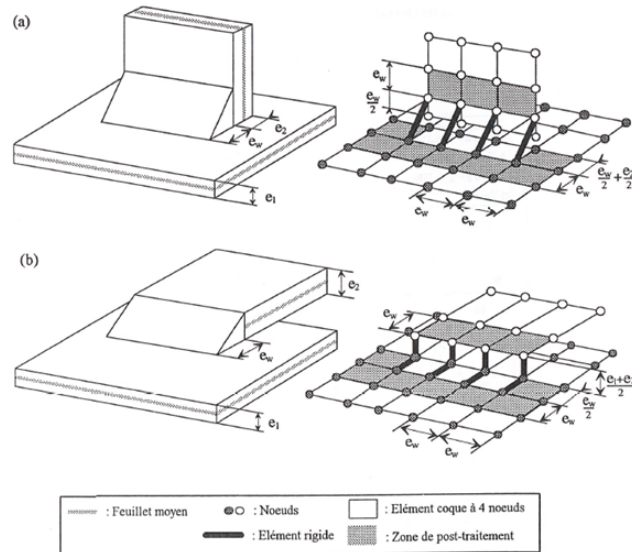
Finite element model used by PSA to design welded assemblies applied to T-joints (a) and overlap joints (b) [5]
